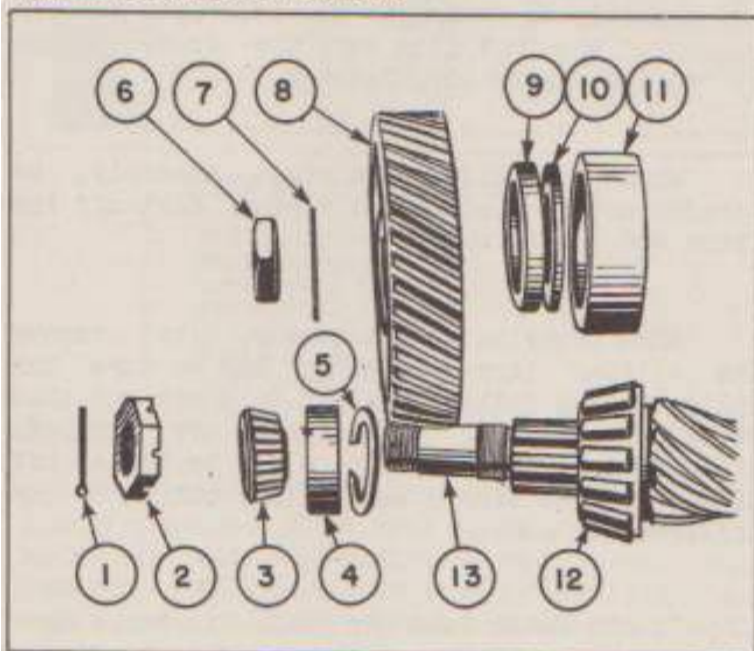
REDUCTION GEAR & PINION SHAFT
